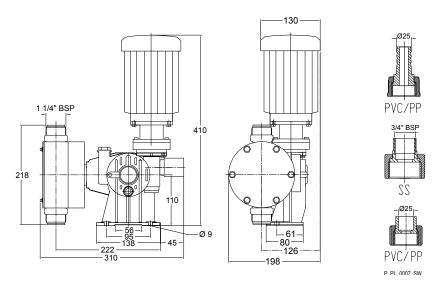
Dimensional drawing of Plasma PSMa - dimensions in mm
